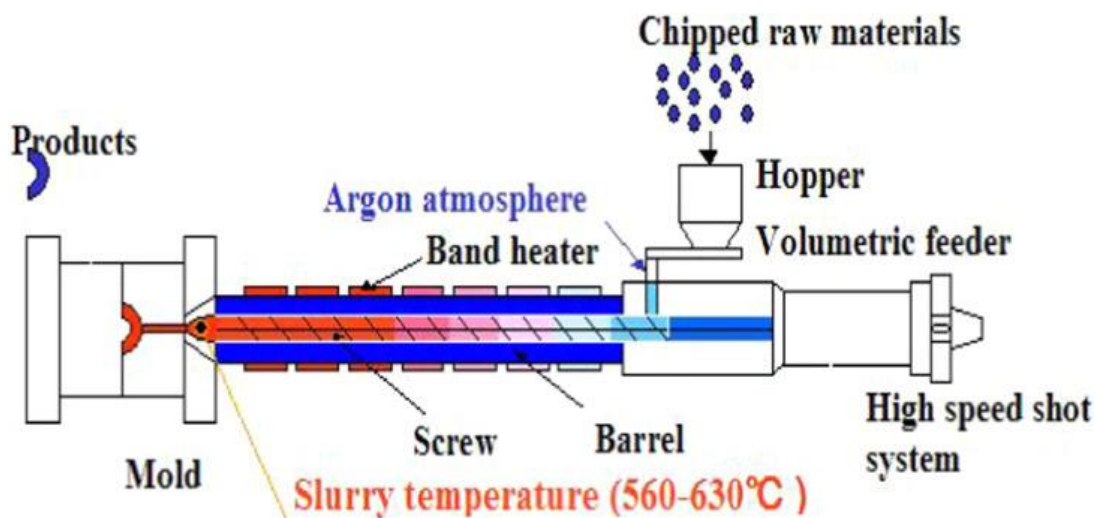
Schematic Illustrating the Thixomolding Process [18].
